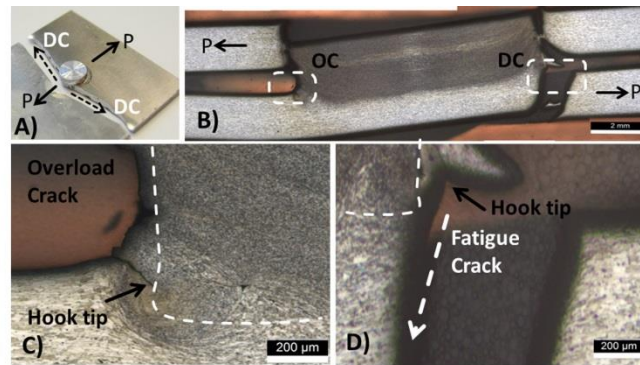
Crack propagation for PPO, specimen loaded at 22.22 MPa or 50% of the ULSS: A) overview of the fracture; B) Cross-section of the spot weld shows the location of the dominant crack (DC) and overload crack (OC); C) Magnified view of the hook interface and DC; D) Magnified view of the hook interface and OC.
